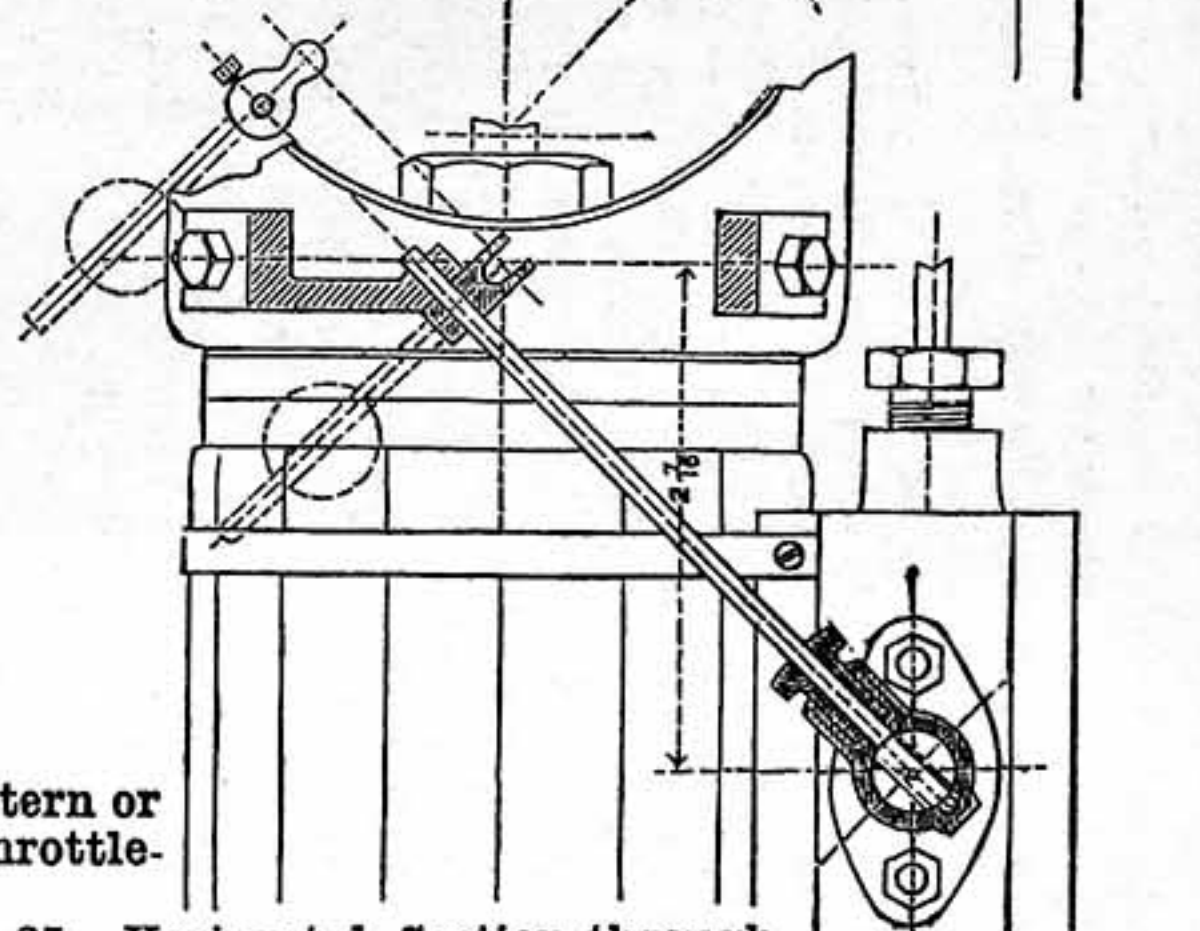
Horizontal Section through Governor Standard and Throttle-Valve.
